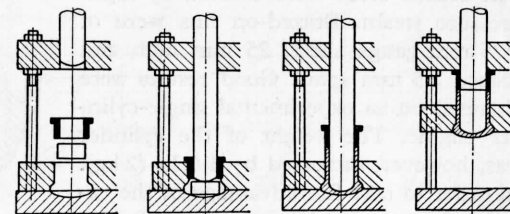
Extrusion of a cylinder liner from a cylindrical blank.
